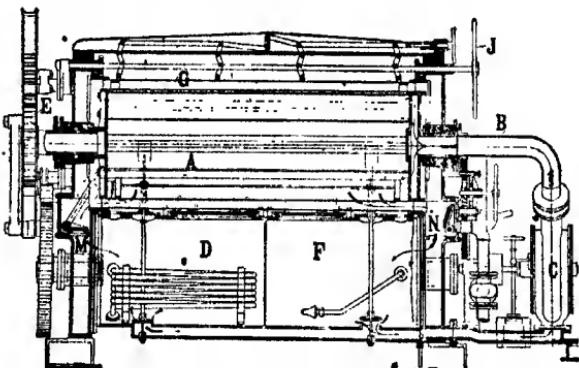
TREICHLER'S WASHING MACHINE. SECTION.
